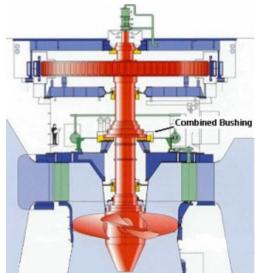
Group Kaplan turbine-generator, detaching the combined bearing
